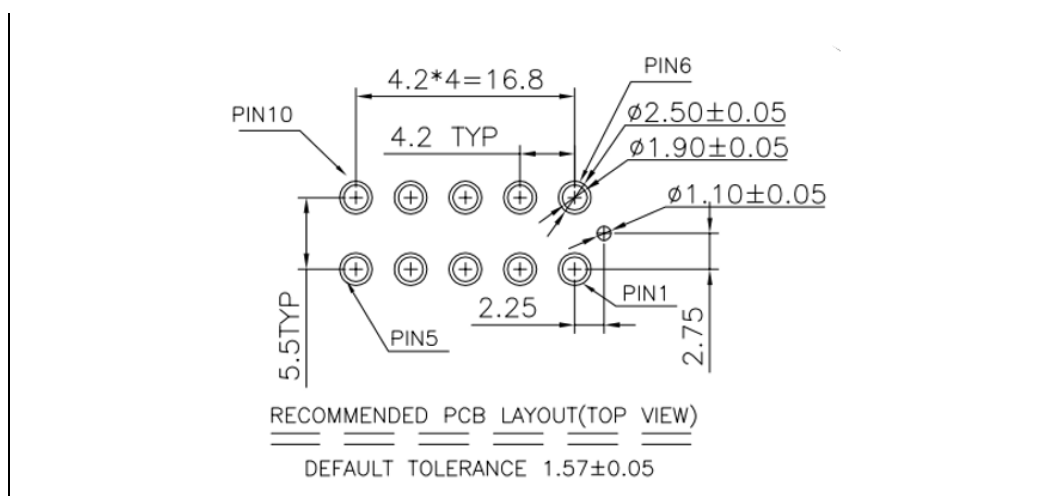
4.2 mm Power Header 10 pin Main Power – Motherboard Connector, PC Board Layout with Dimensions
